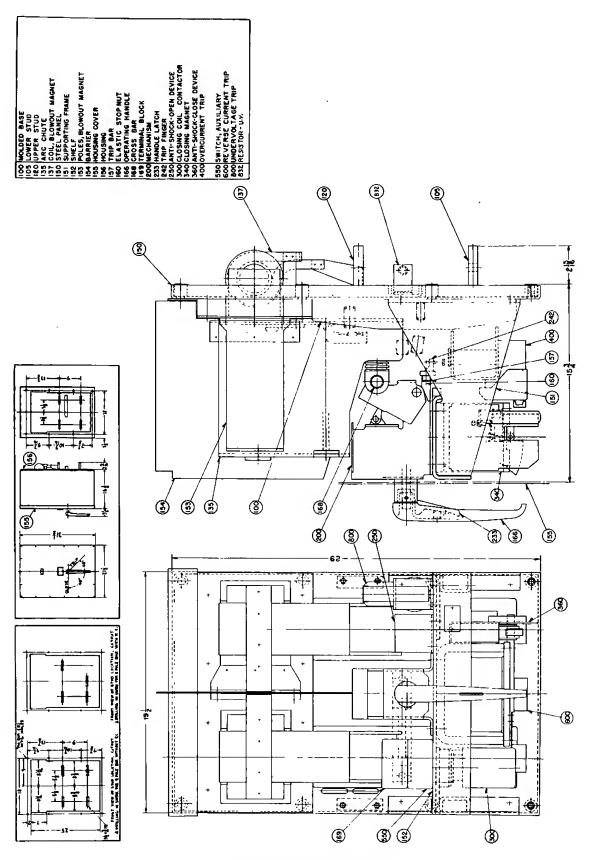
Air Circuit Breaker—General Assembly (Dwg. 445D378)
